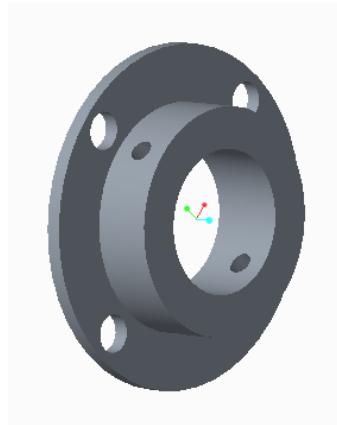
Piece used the union of the small sprocket and the shaft.
